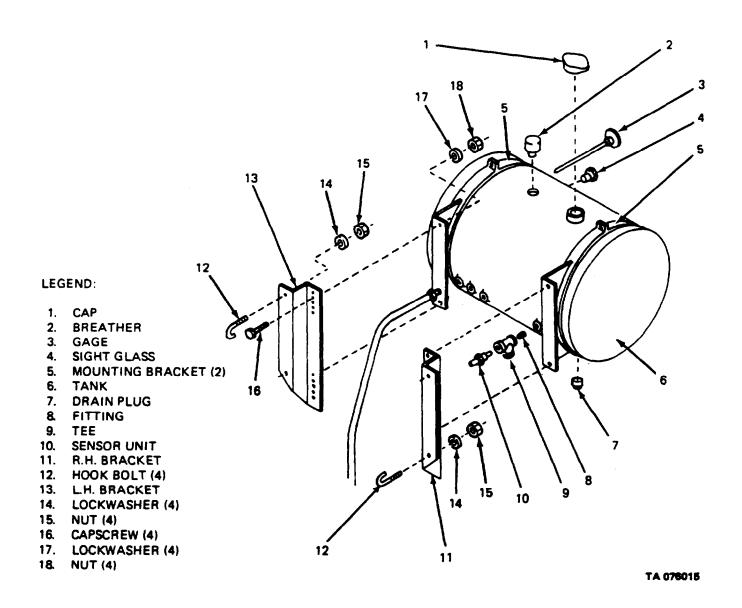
Disassemble/Reassemble Hydraulic lank.
